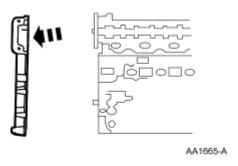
Removing Engine Front Cover From Cylinder Block Courtesy of FORD MOTOR CO.
